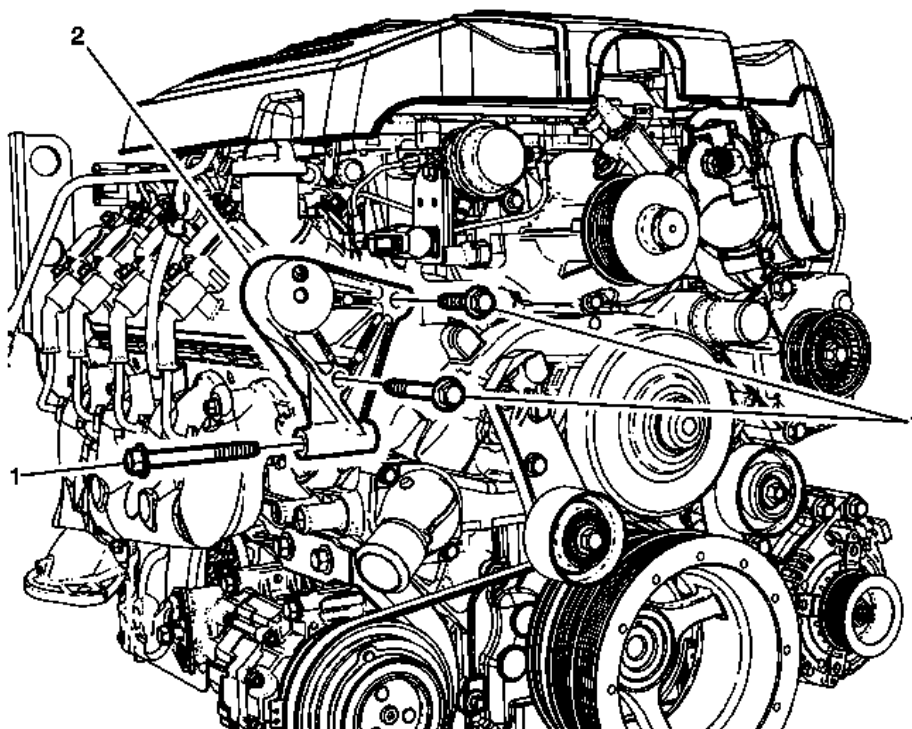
Supercharger Belt Tensioner Bracket & Fasteners
